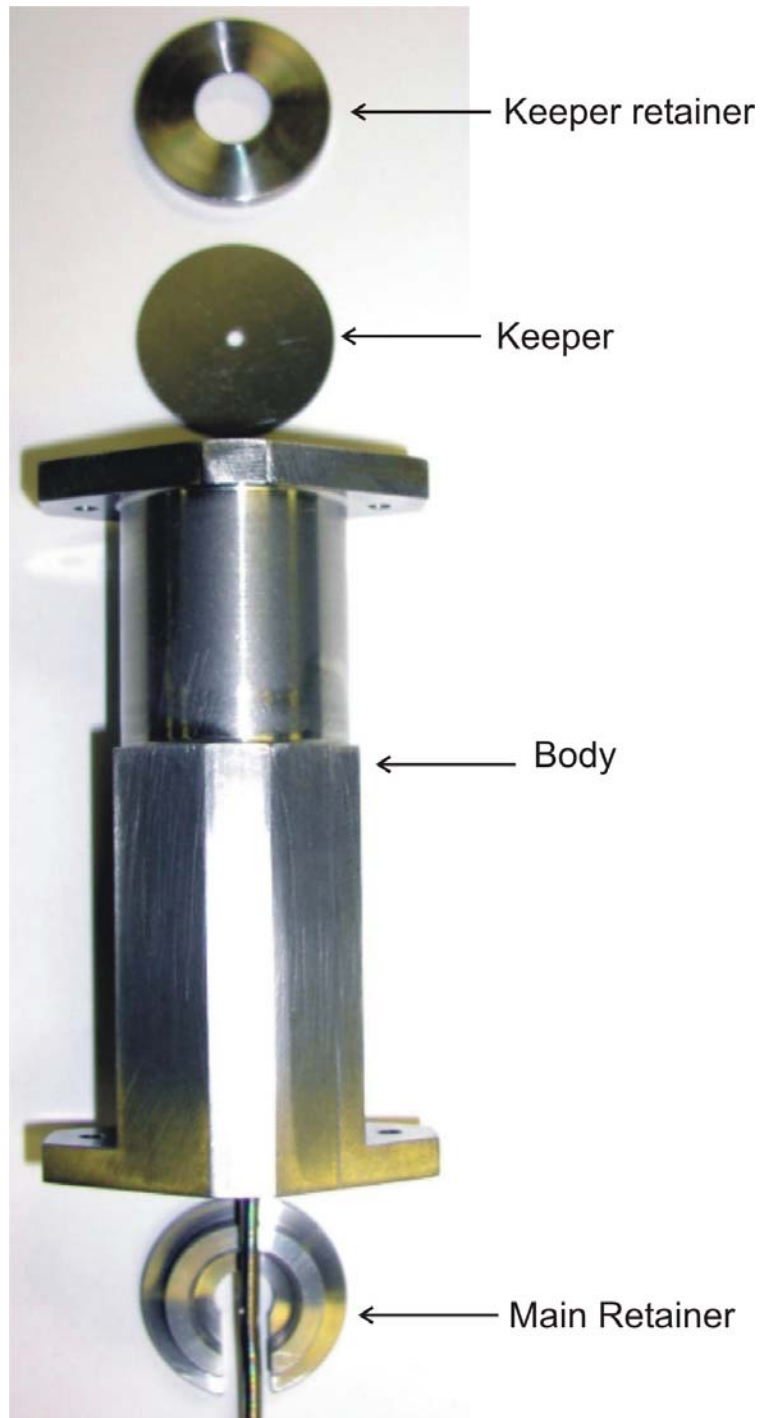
Keeper, keeper retainer, inner and outer main retainer removed.
